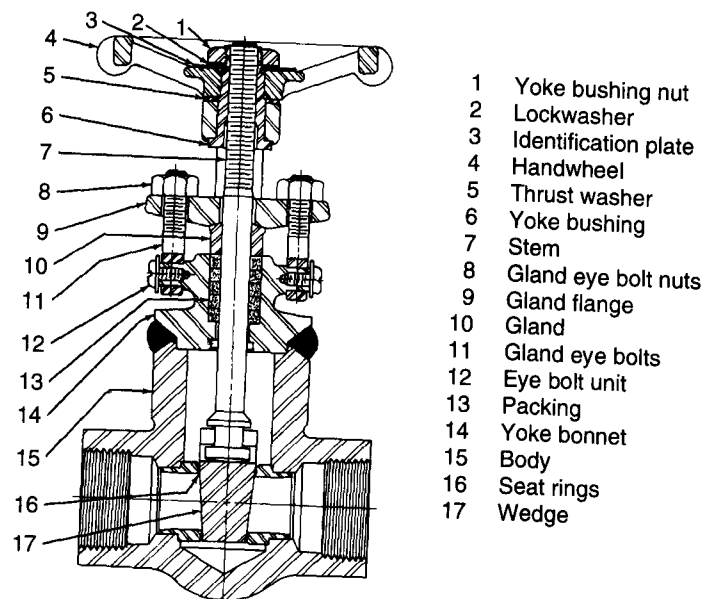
Rising-stem, welded bonnet, one-piece (solid) wedge disk, O.S.&Y. gate valve. Courtesy Crane Company.
